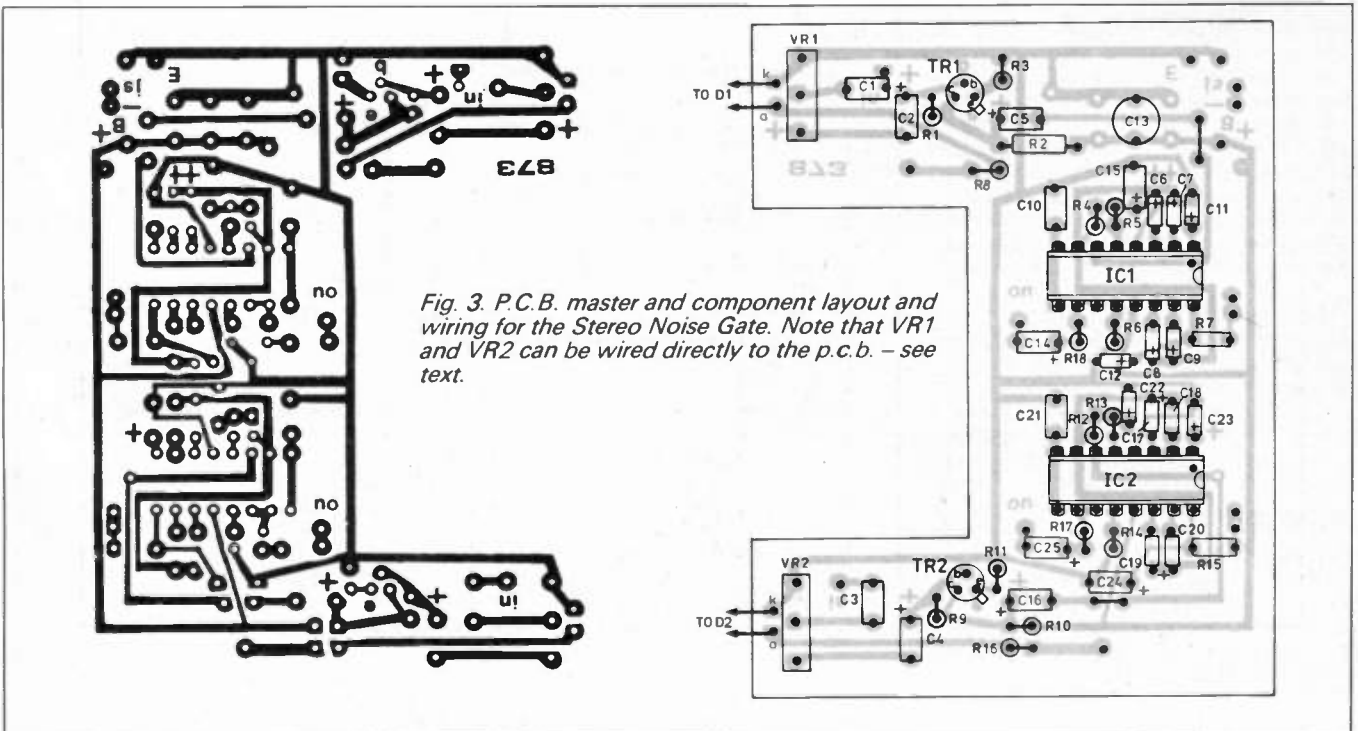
P.C.B. master and component layout and wiring for the Stereo Noise Gate. Note that VR1 and VR2 can be wired directly to the p.c.b. - see text.
